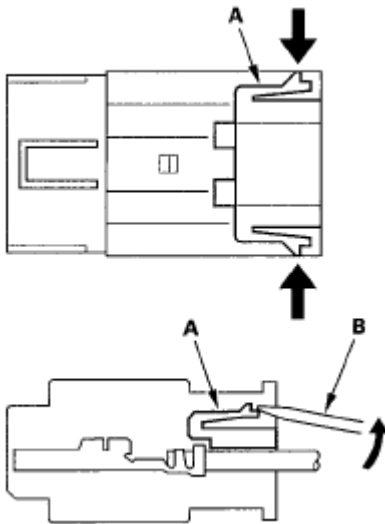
Removing Retainer Using A Flat-Tip Screwdriver
